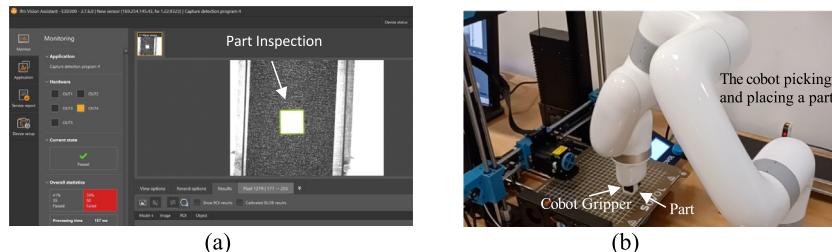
(a) Camera inspection output and (b) Robotic pick-and-place.
